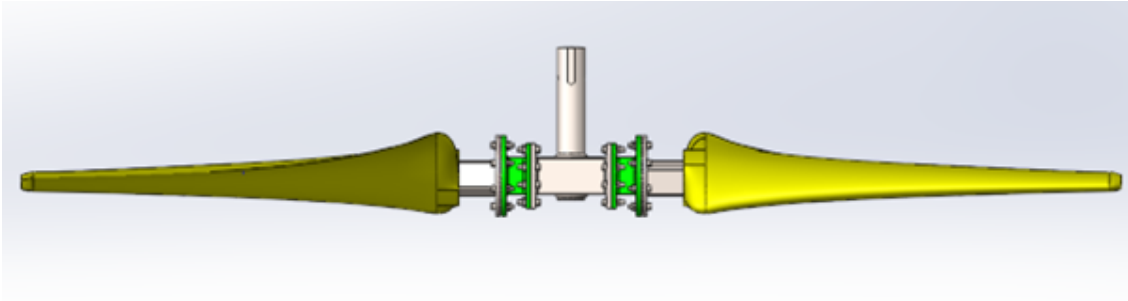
Top view of the RRES blade and hub assembly with the blade root strain housing coloured green.
